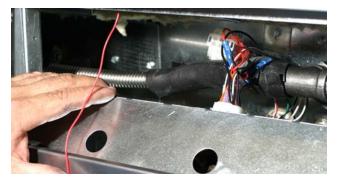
Ensure the wiring harness to the control box comes over the shielded area of the oil-return manifold.
